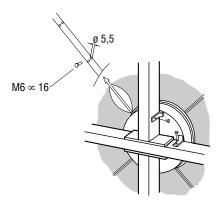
4. For sizes 460 – 500, drill a 5.5 mm dia, hole through the existing holes in the spokes and into the rotor sectors. Fit M6 \propto 16 mm long countersunk head, self-tapping screws.
